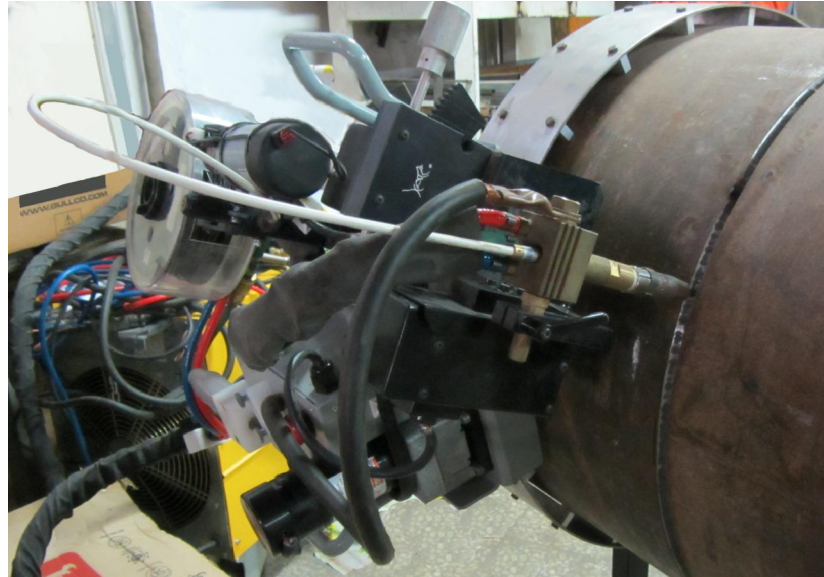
Open head welding machine for welding of pipes with large diameter [52]
